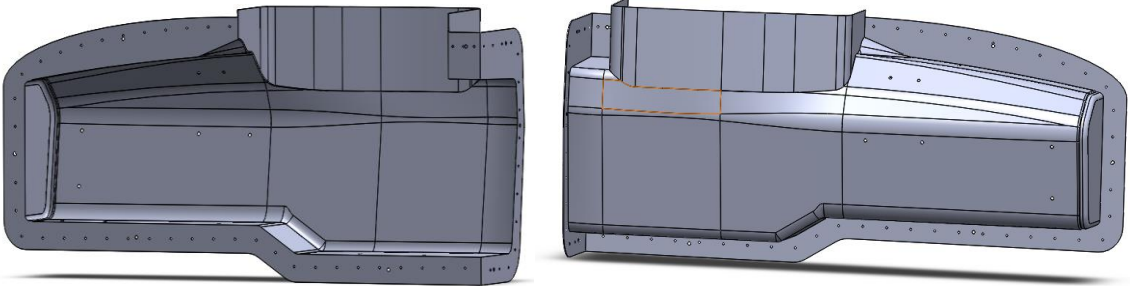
Front RHS female mold inside view (left) and outside view (right).
